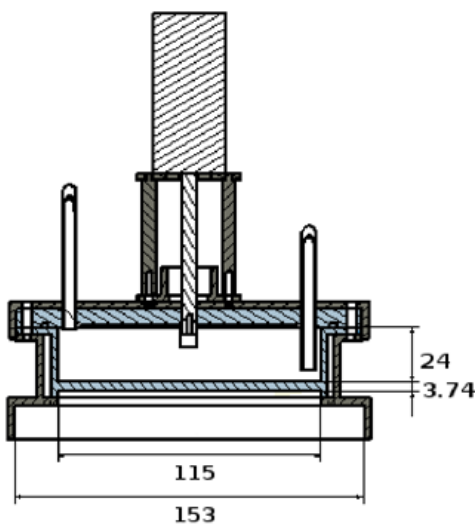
Cross-section of a fluid bolometer. The dimensions are in millimeters^[7].
